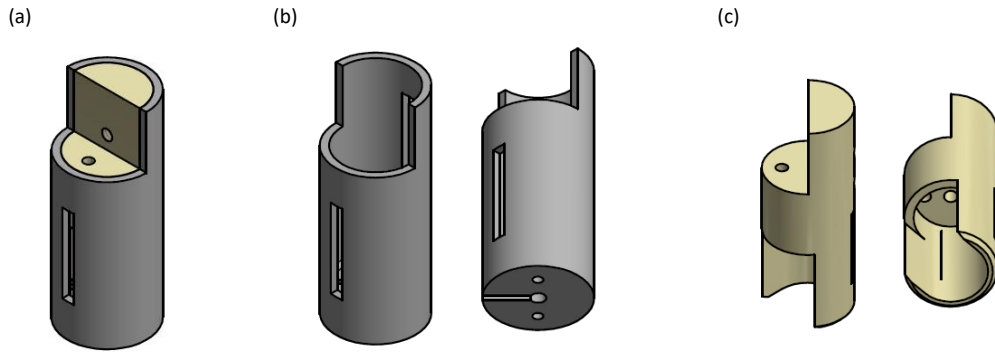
The 3D mechanical drawing of the inner and outer tubes of our constant-temperature TDO setup. (a) The combined tubes. (b) The outer tube. (c) The inner tube.
